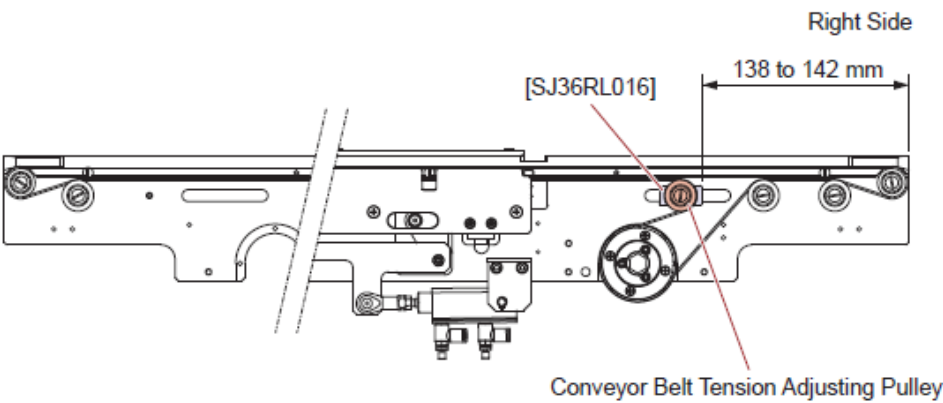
Adjust the Conveyor Belt Tension (BF-3Di-L1)
